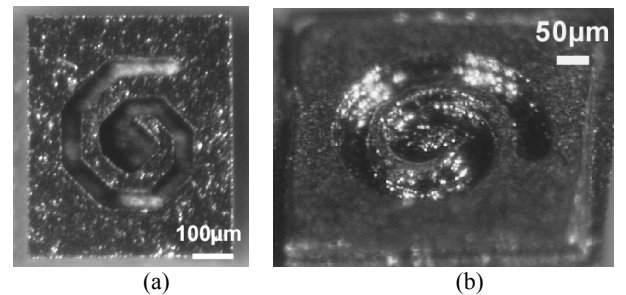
(a) Photos of the microtool fabricated by serial μEDM . (b) A circular spiral shape microtool is also possible using batch mode μEDM .
